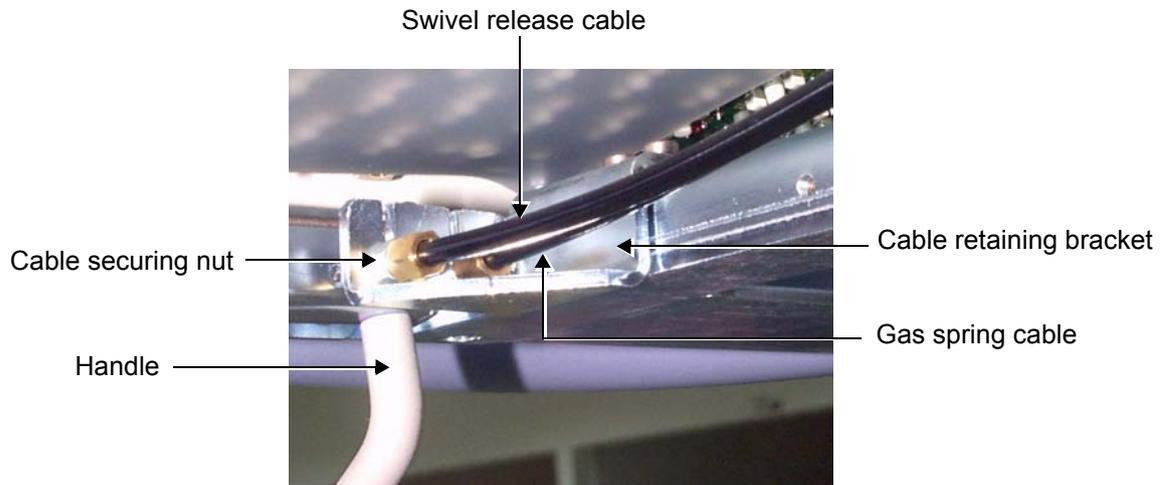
Handle and Gas Spring Cables - Close-up View
